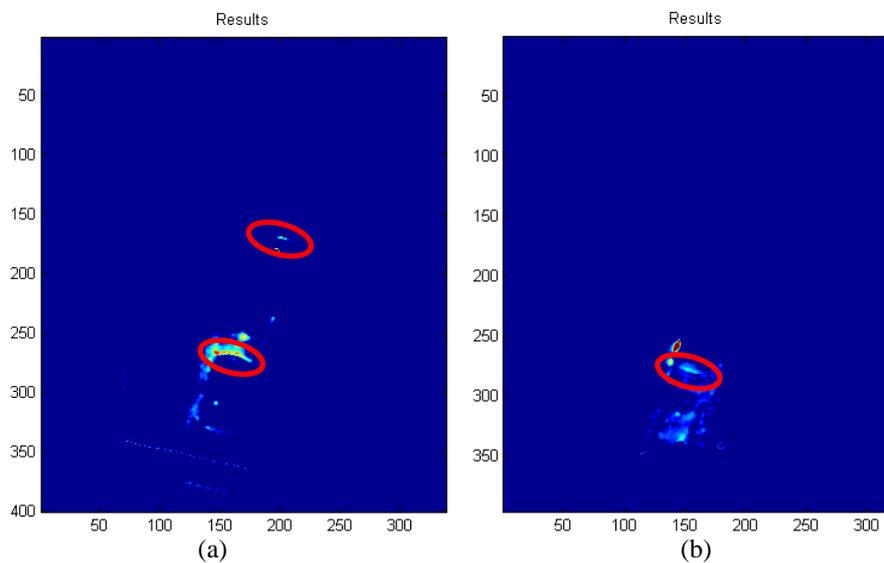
Two cracks across the weld in test sample 4.
